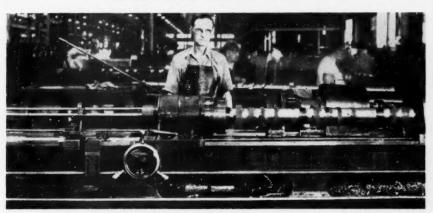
The gun drill, shown here, consists of a tubular steel shank with a high speed steel tip. An oil tube extends lengthwise through the drill
